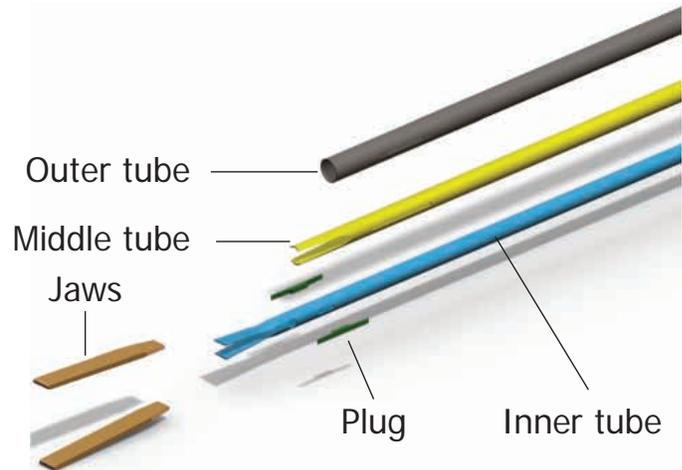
Adhesive grasper: exploded view (tubes shortened)
